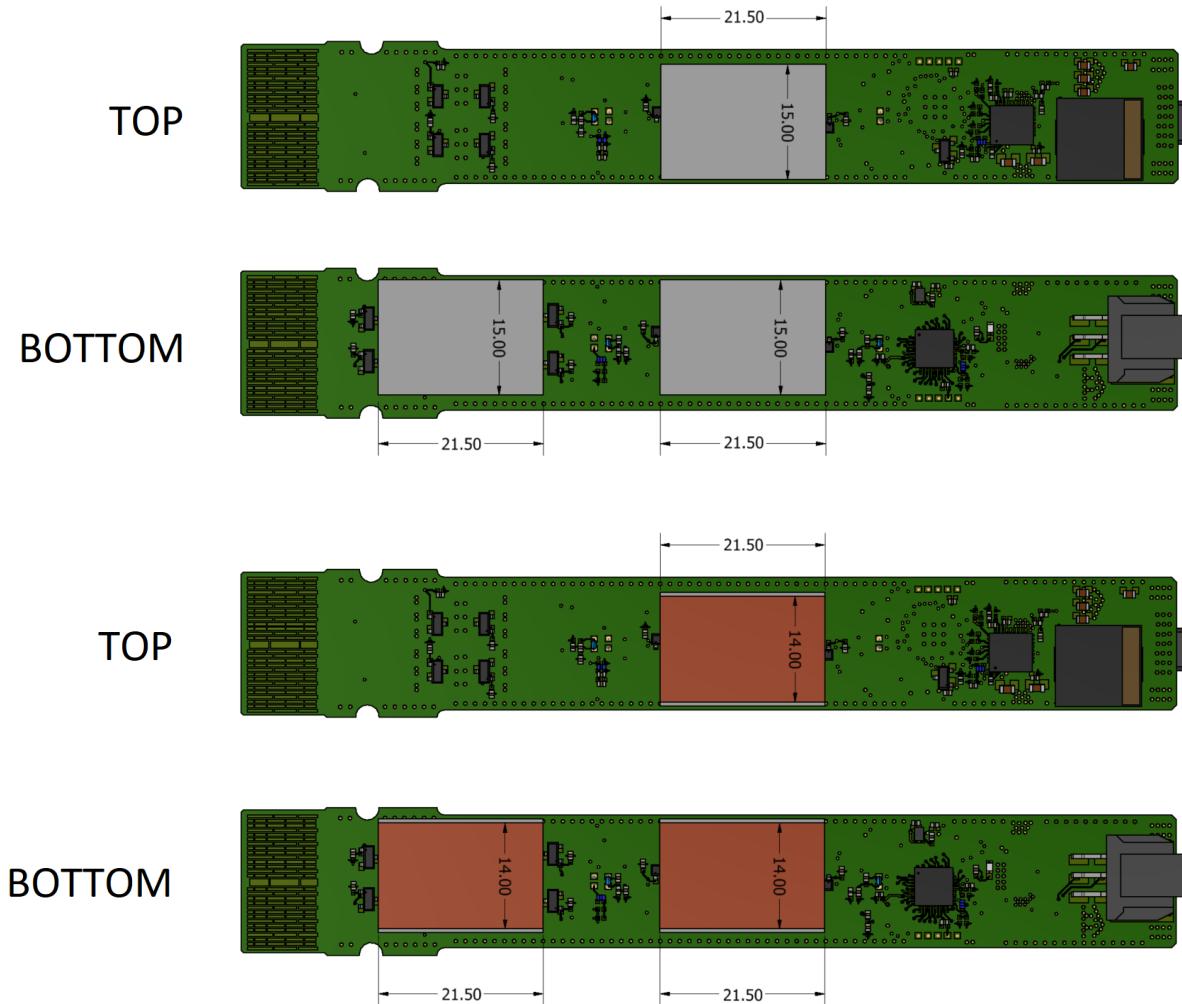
Module assembly top and bottom view with TIM pads and copper plates
